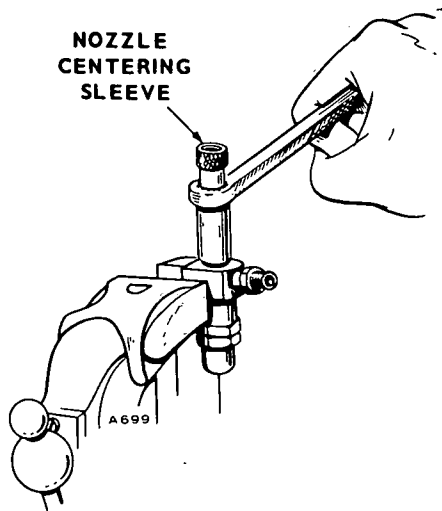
TIGHTENING NOZZLE CAP NUT
